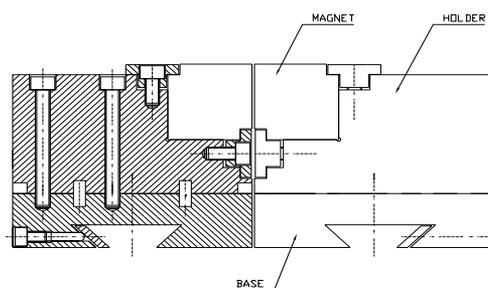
Cross section of the two lower arrays showing the mechanical clamping system of the magnet blocks.
